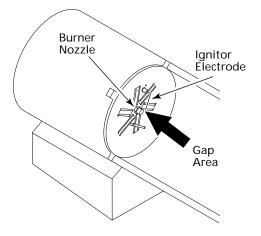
Clearance between Ignitor Electrode and Target Plate
